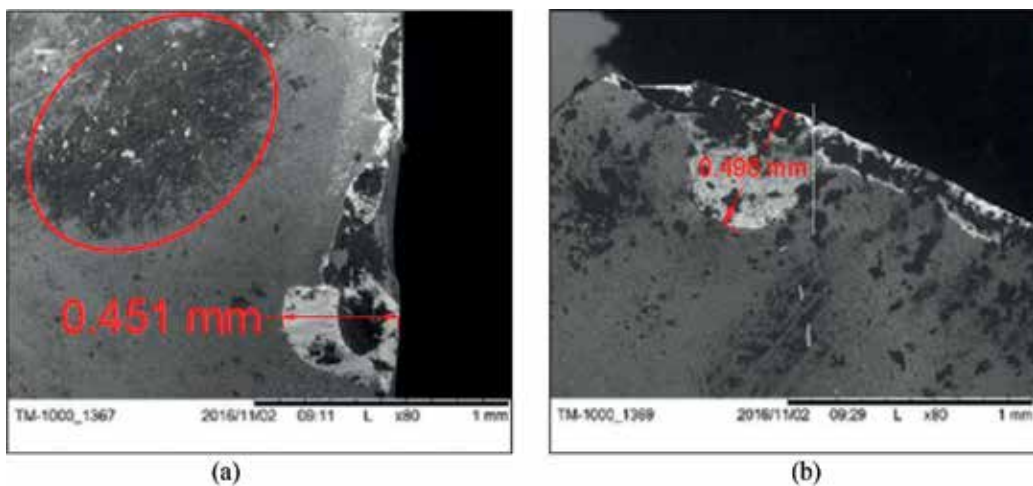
Tool wear under MQL nanofluid with soybean oil (cutting time at 80 minutes): (a) rake face wear; (b) flank face wear [19].
